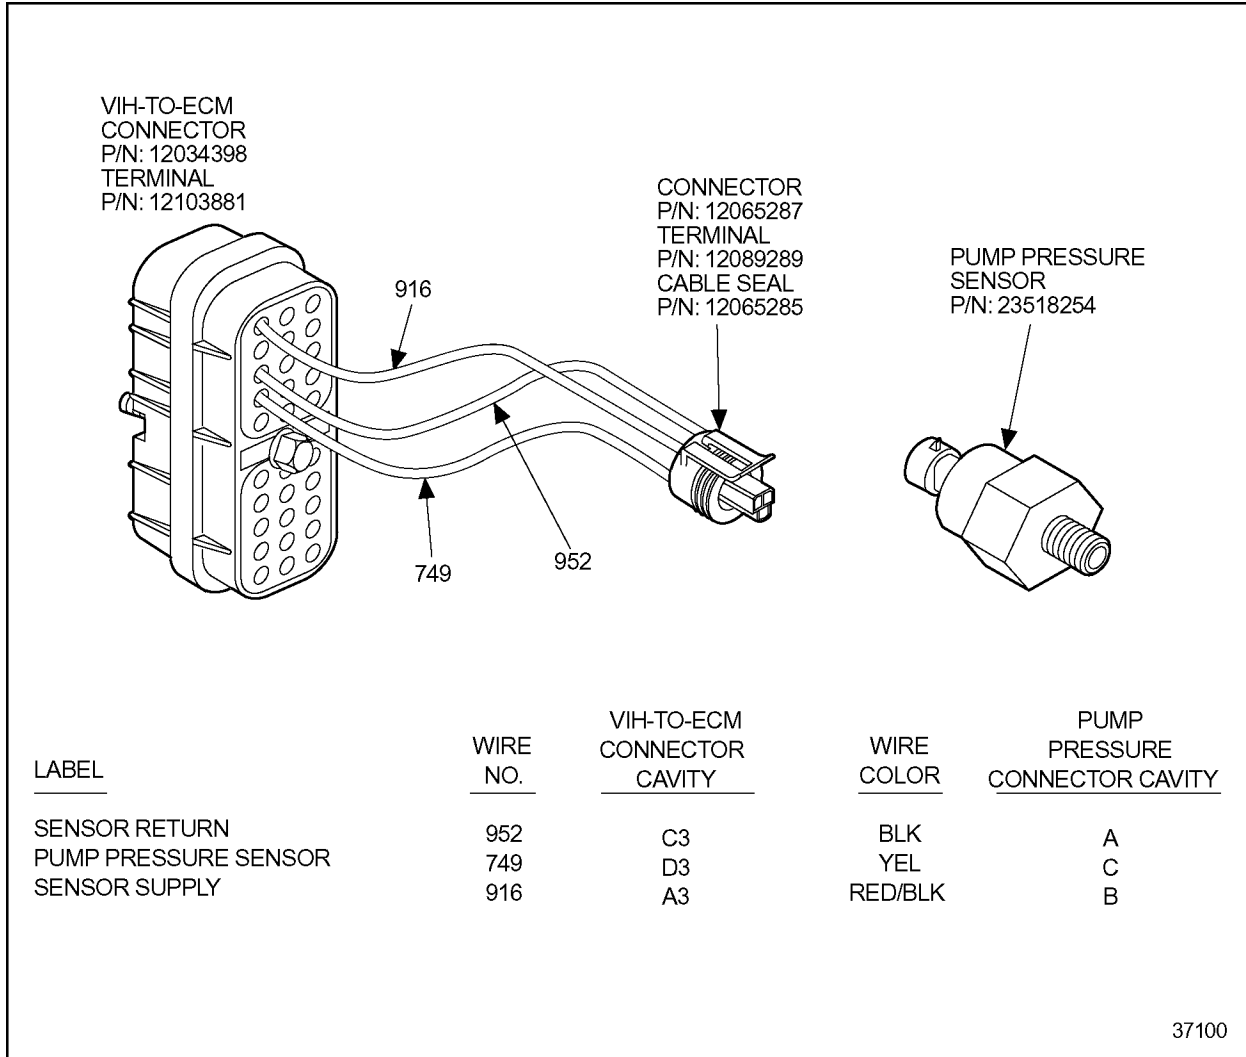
Fire Truck Pump Pressure Sensor Installation
